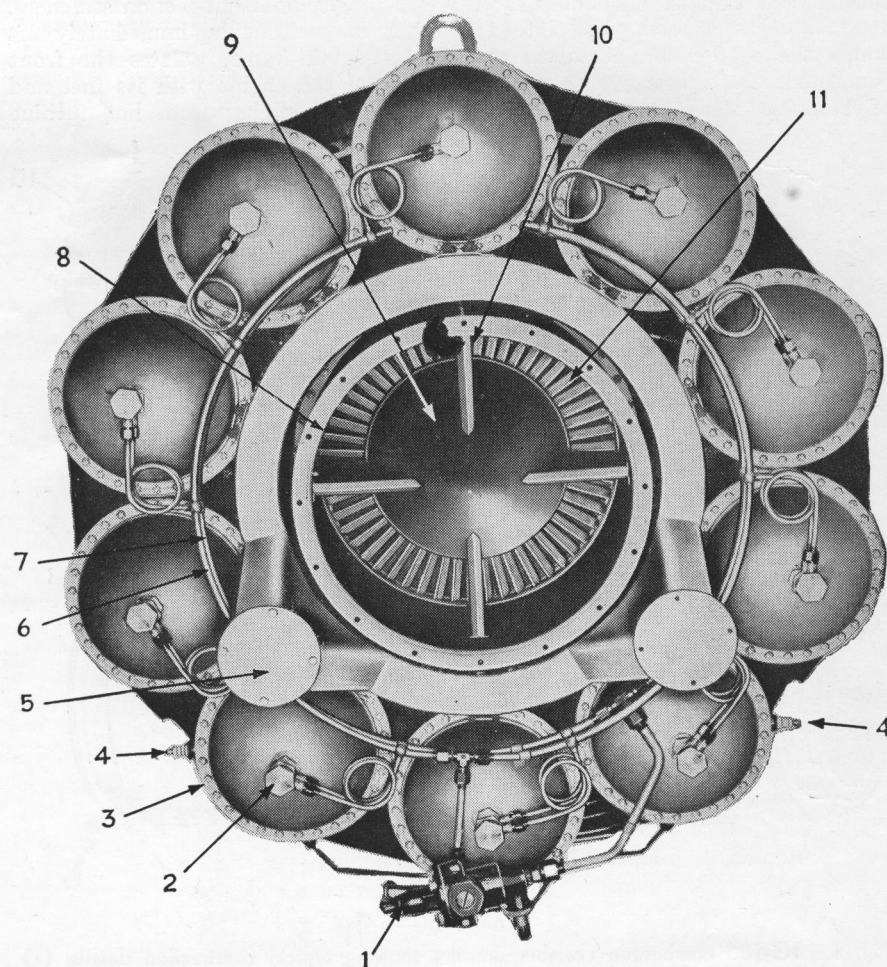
Rear view of I-16 turbojet unit showing (1) duplex meter valve; (2) fuel nozzle; (3) combustion chamber; (4) spark plug; (5) cooling air manifold; (6) and (7) rear and front fuel manifolds; (8) exhaust cone; (9) inner exhaust cone; (10) strut; (11) turbine wheel.
